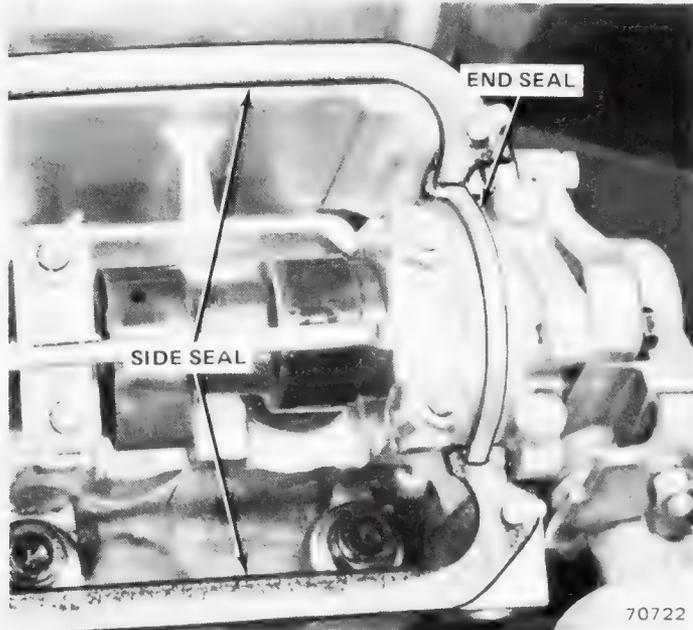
B-33 Cylinder Head Cover Gasket Installation
